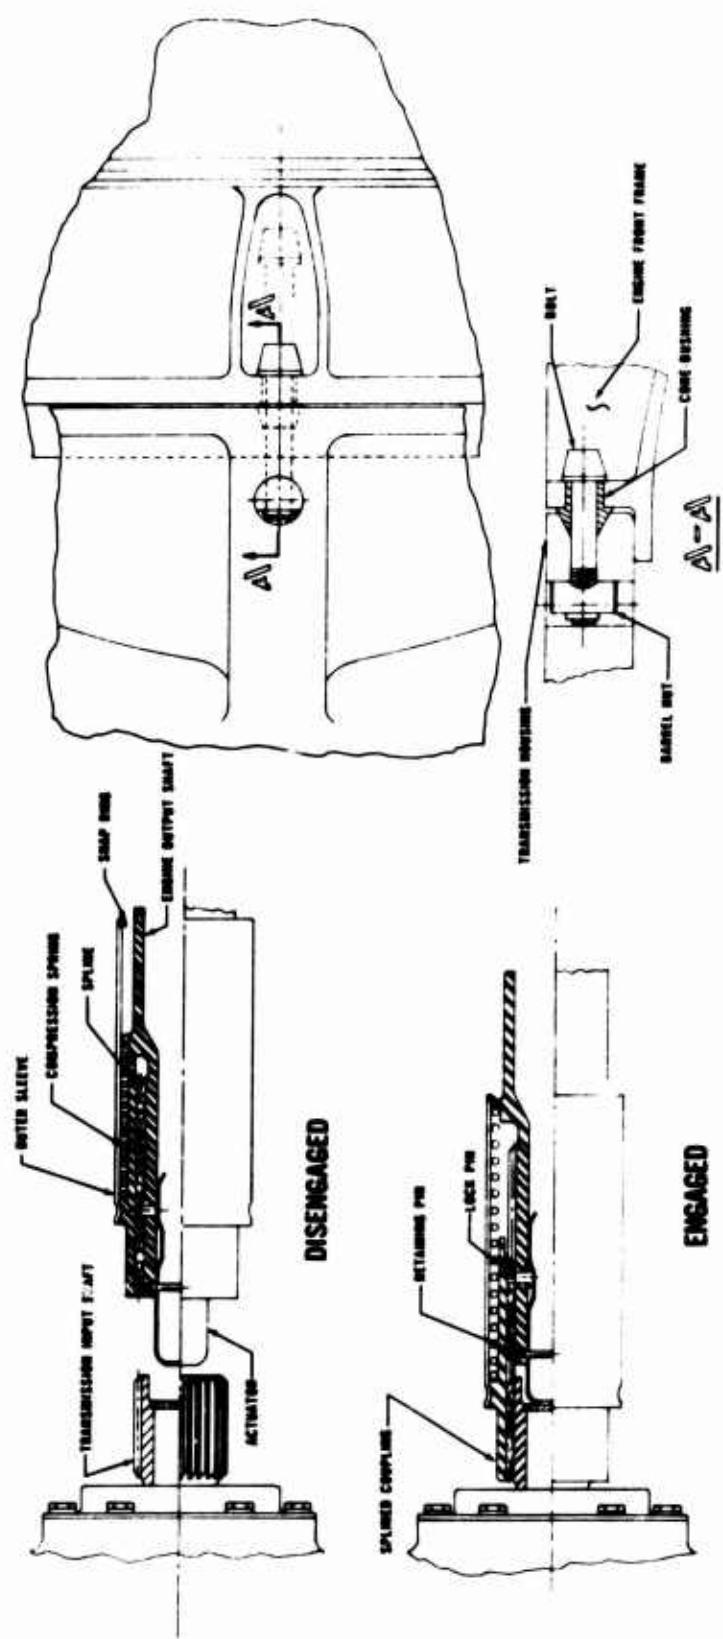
Details of Shaft Coupling and Bolted Joint for Flange-Mounted Engine Design.
